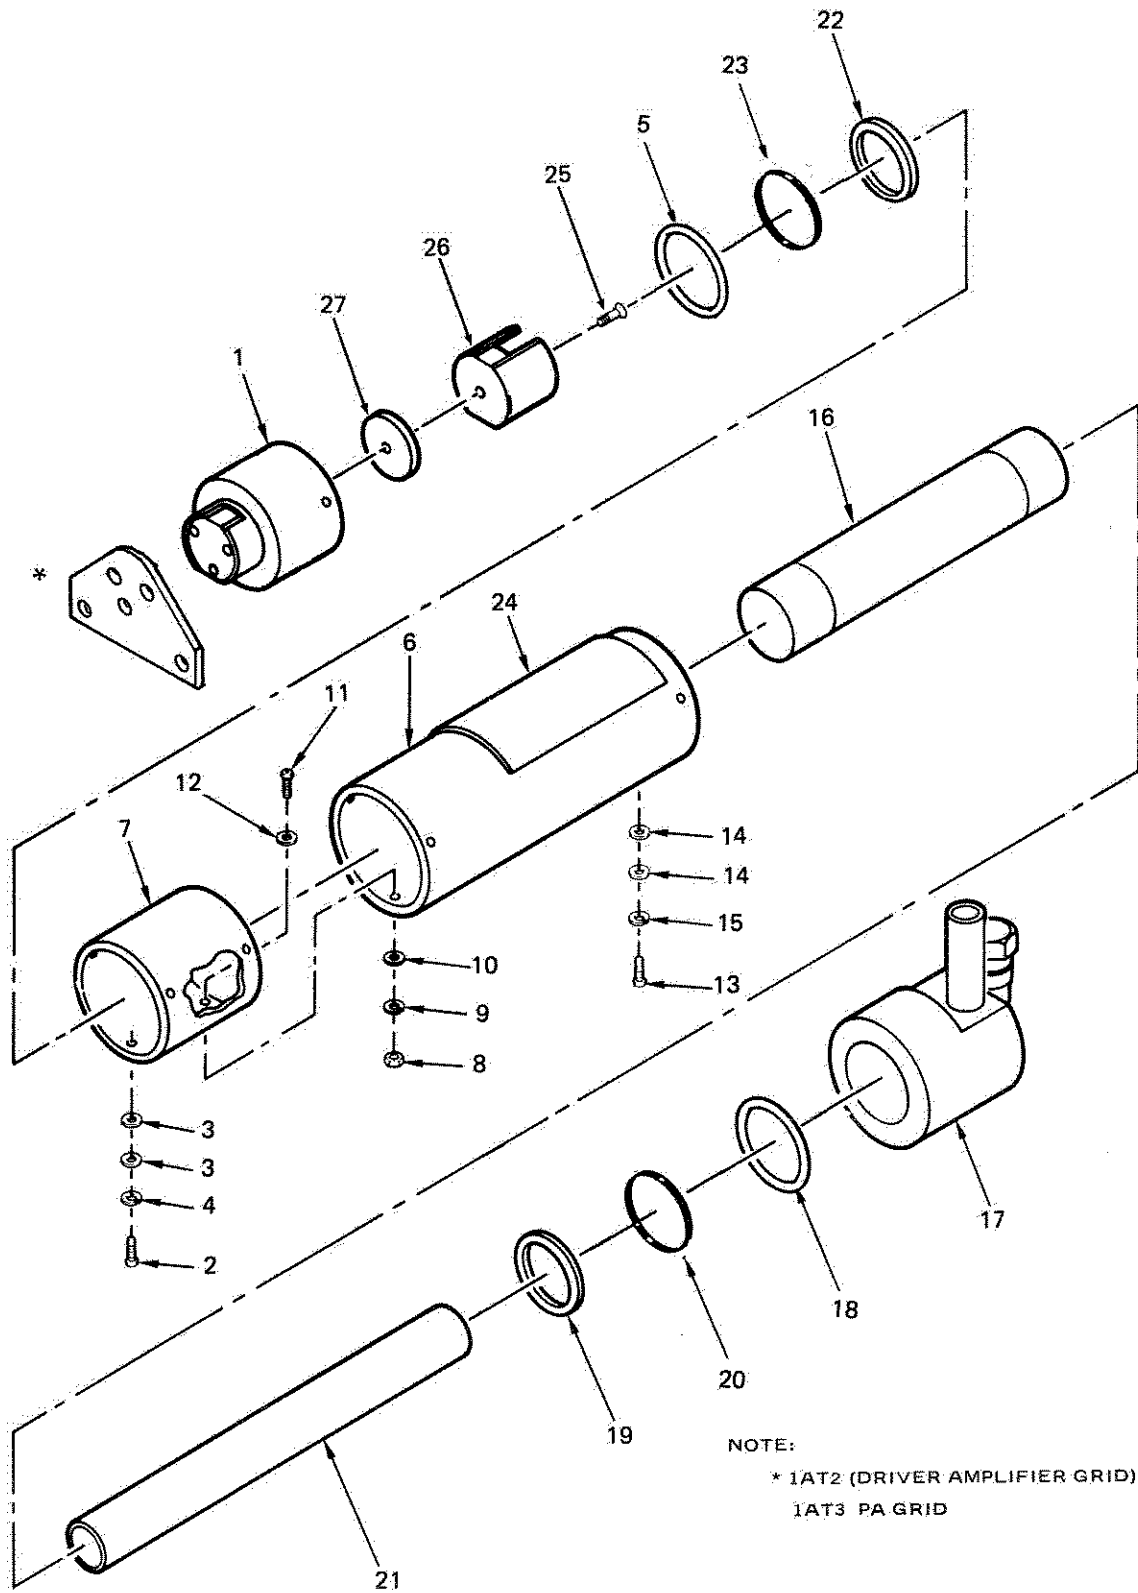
1AT2, 1AT3 Disassembly/Reassembly
